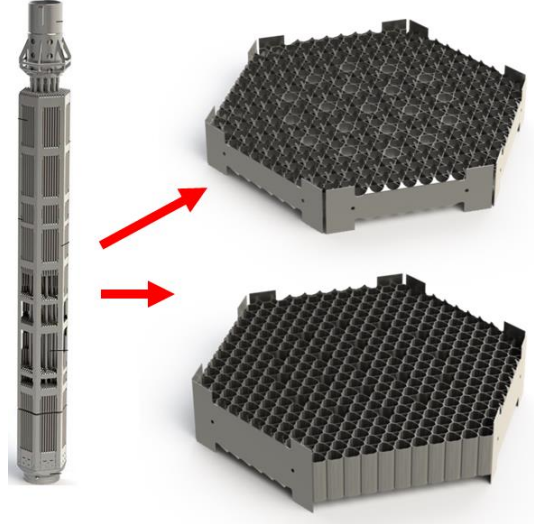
VVER1000 fuel assembly with detail of mixing (the upper one) and spacer grid (the lower one).
